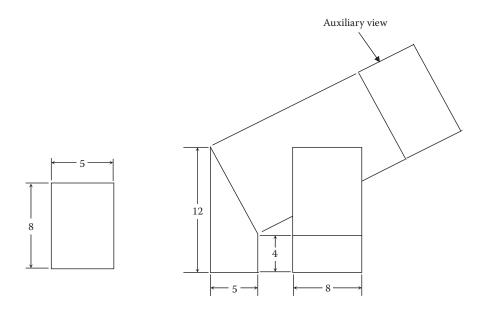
Object with inclined view shown in Figure 3.32 with auxiliary view added to give size and shape of inclined surface.
